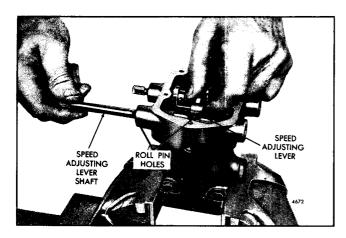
Installing Speed Adjusting Lever Shaft in Governor Housing and Adjusting Lever
